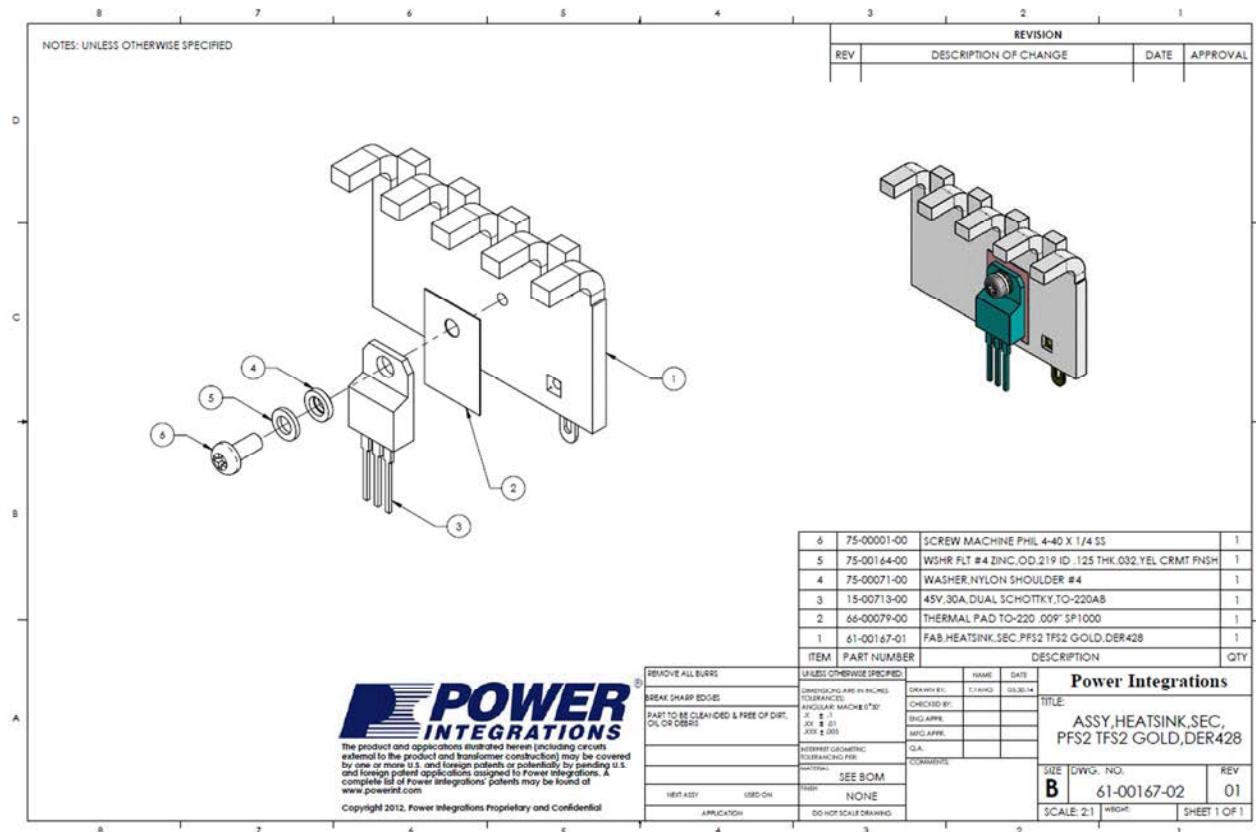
DER-428 Secondary Heat Sink Assembly.
